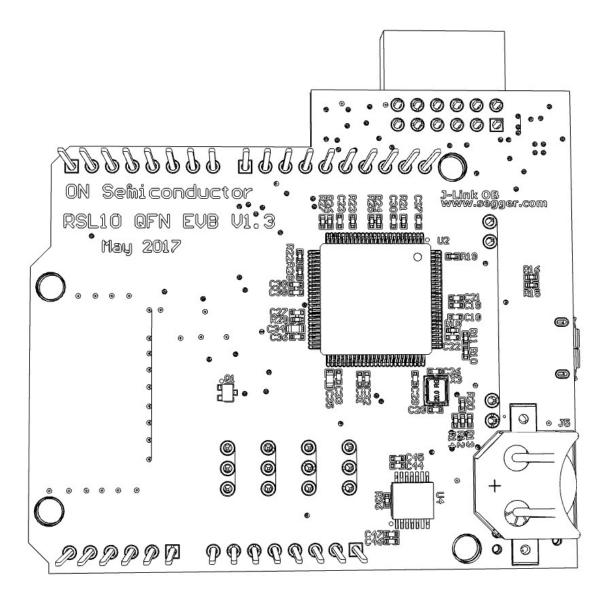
Three-Dimensional Line Drawing of the QFN Board (Bottom View)
